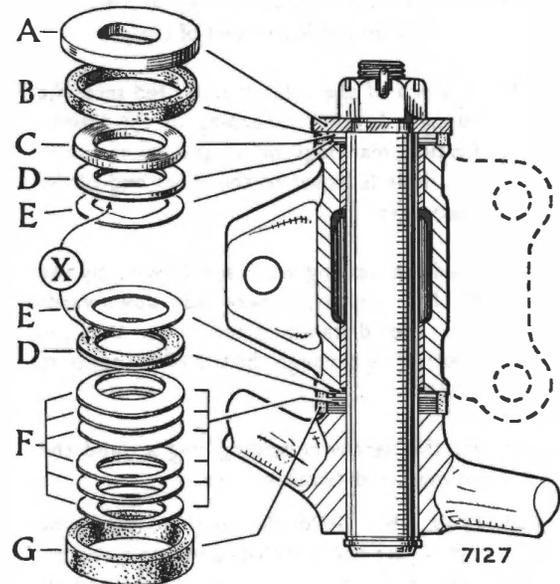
Cross section view through later steering relay lever assembly, note the method of assembly for the Belleville washer pack.
